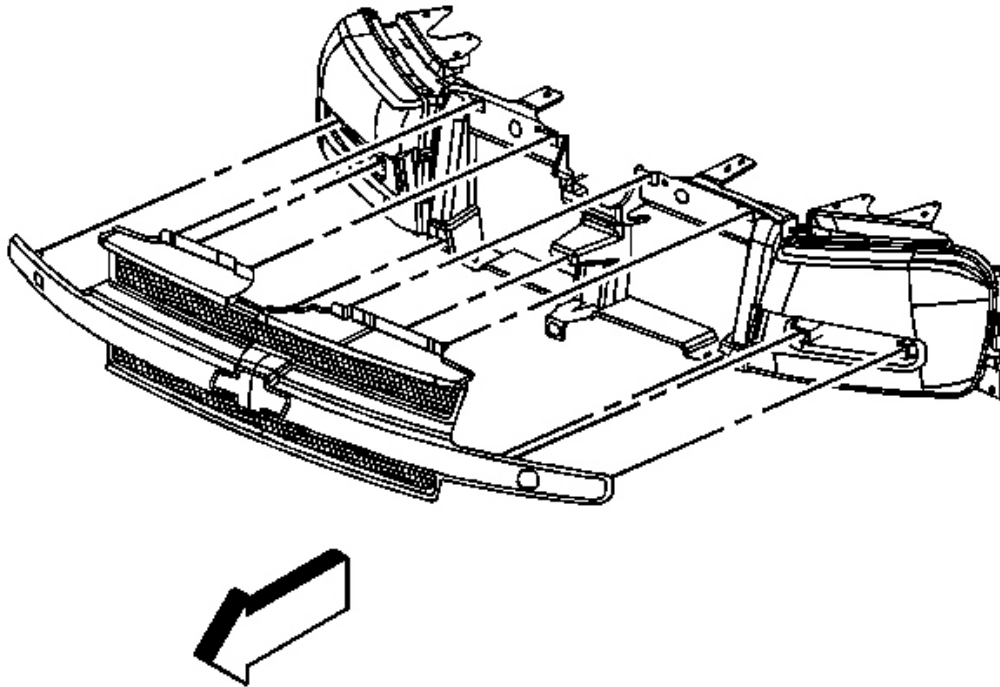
View Of Grille (Envoy, Envoy XUV)
